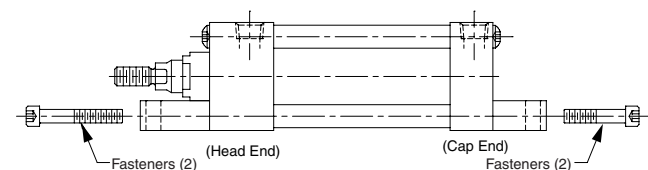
Side End Lug Mounting Kit - Style MS7
